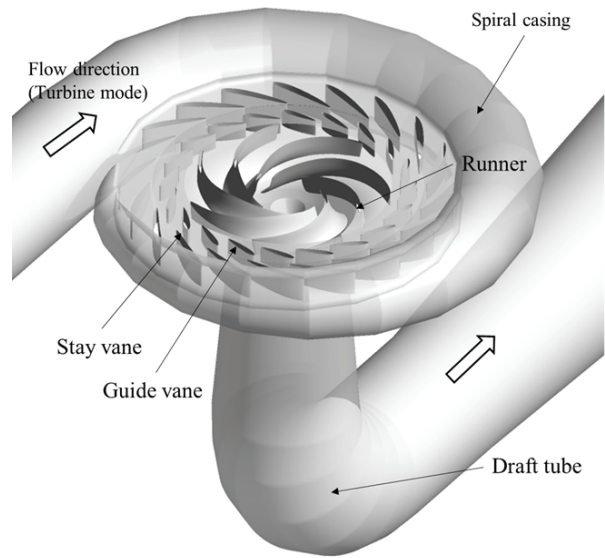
Three-dimensional (3D) model view of a pump-turbine
